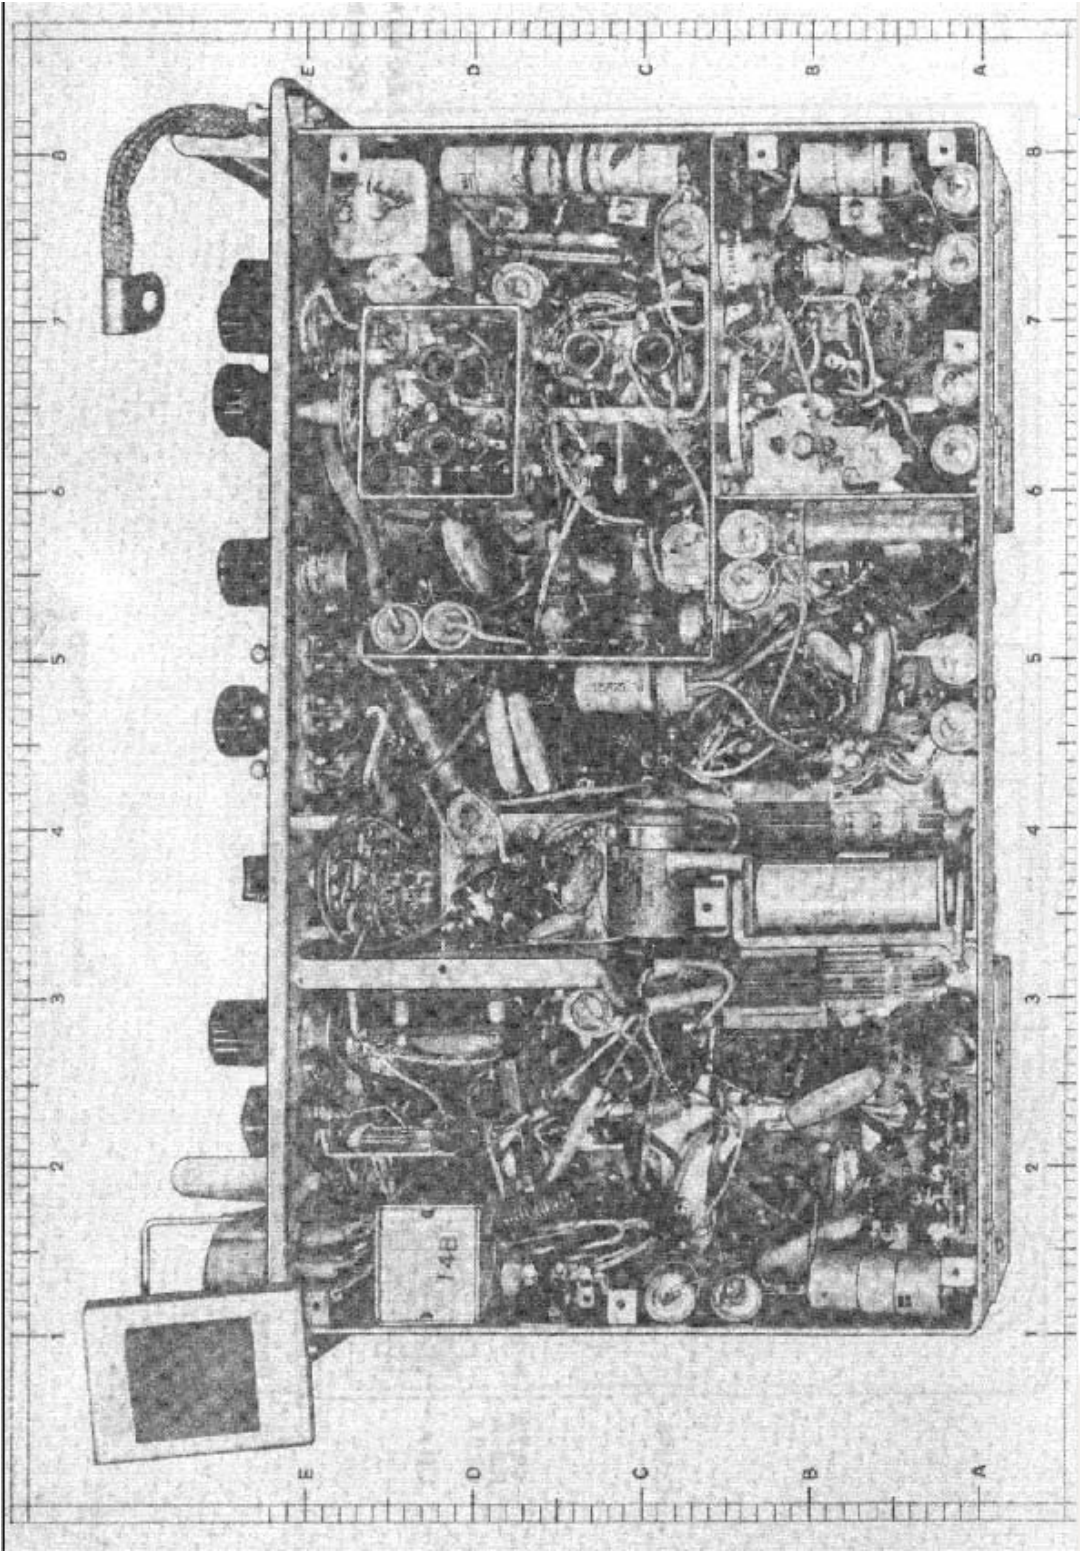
BOTTOM OF CHASSIS (PHOTO)
